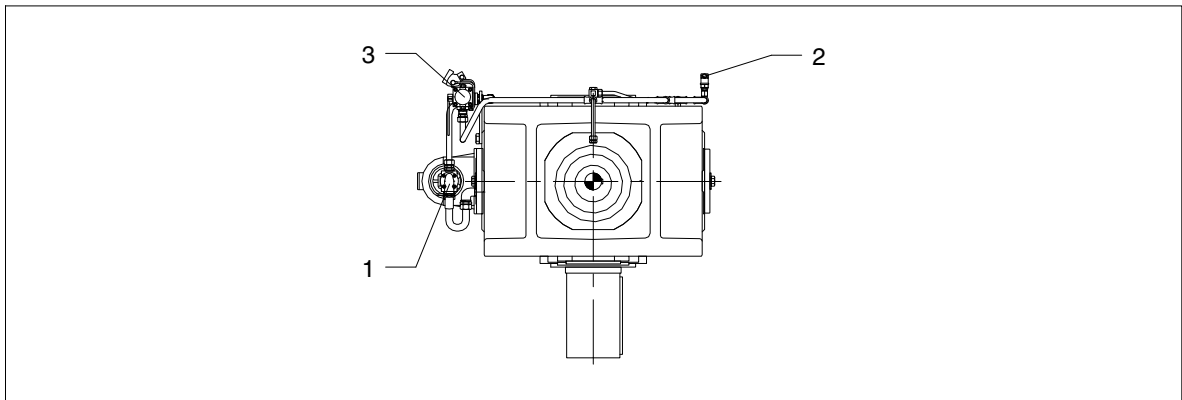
Add-on oil-supply system with motor pump in case of type B..V
